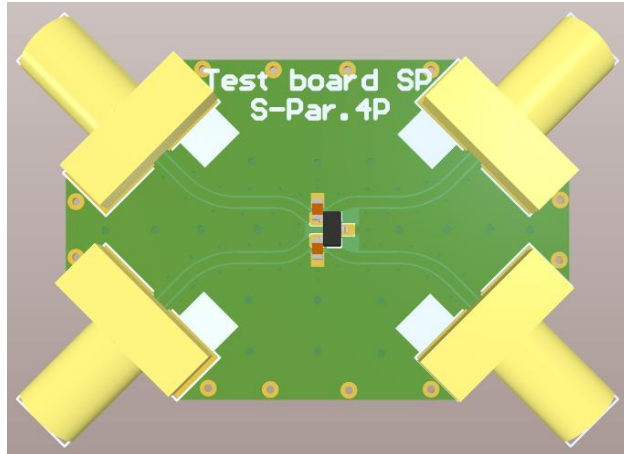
Example Test fixture S-Parameter measurement - mixed mode, top layer
